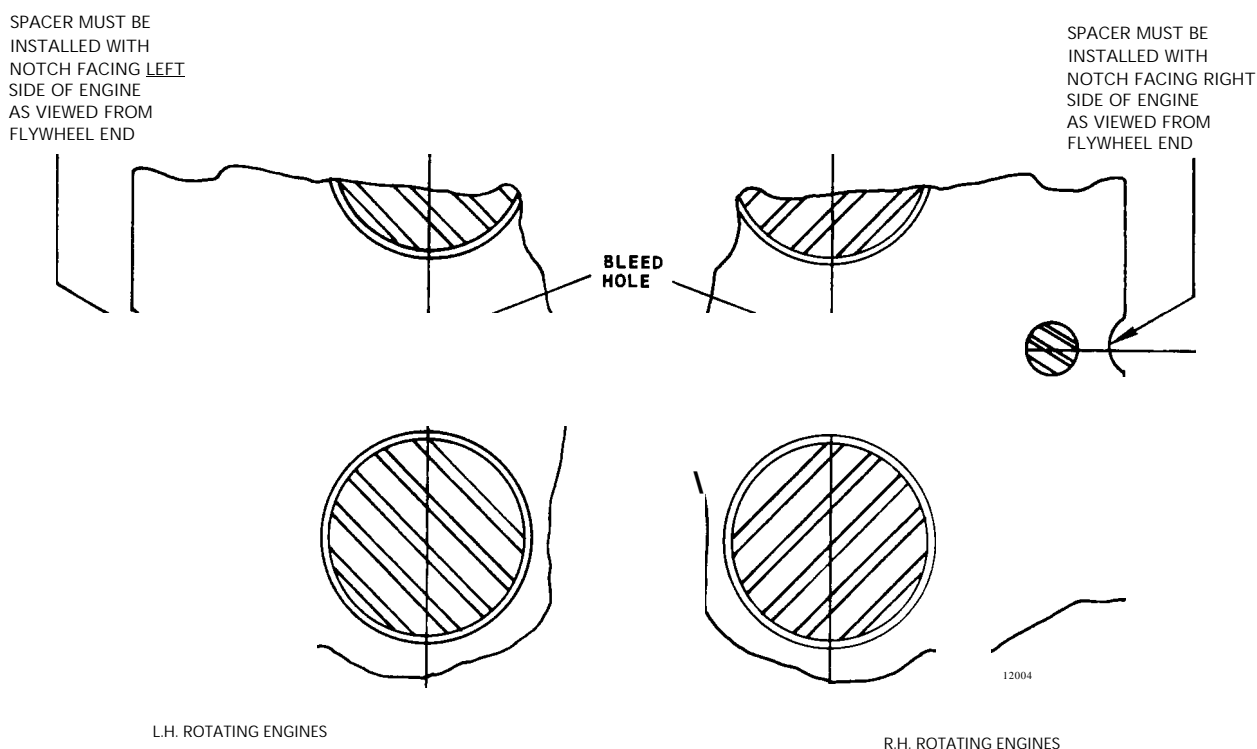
Orientation of Oil Pump Spacer Bleed Hole
